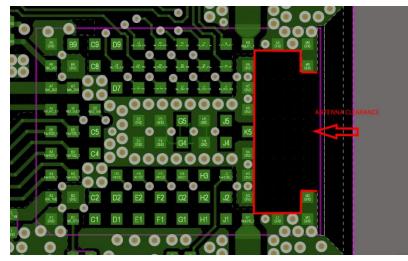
PCB artwork on main PCB top layer showing MAYA-W166-00B placement and GND clearance
